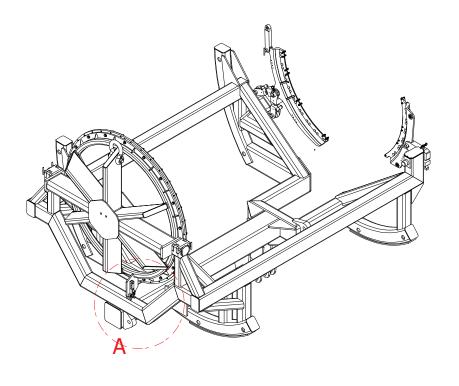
AGSE-E21507-S01 Cradle Assembly
